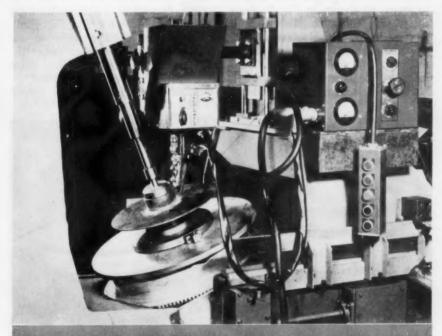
Sheared and punched disc is assembled to turned hub barrel and welded automatically on both sides in the submerged arc welding setup, shown herewith.
